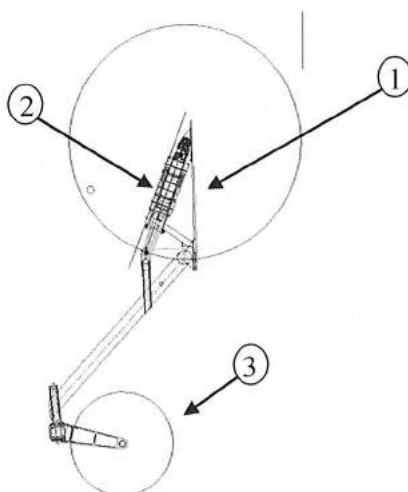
NOSE LANDING GEAR STRUCTURE
